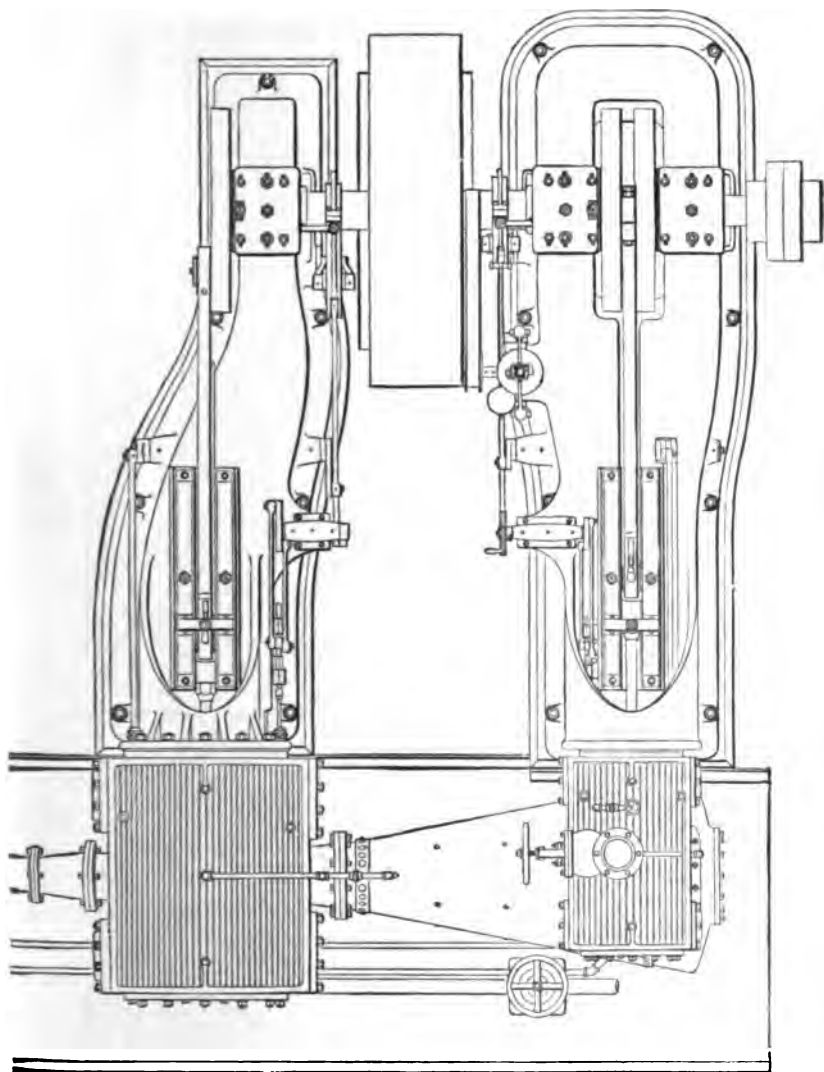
PLAN OF ROLLING-MILL ENGINE.
